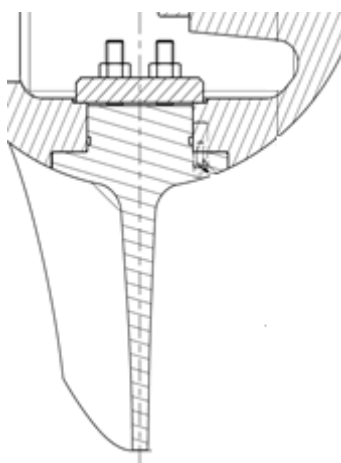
Separately mounted impeller adjustable blades (Andritz, internal source)
